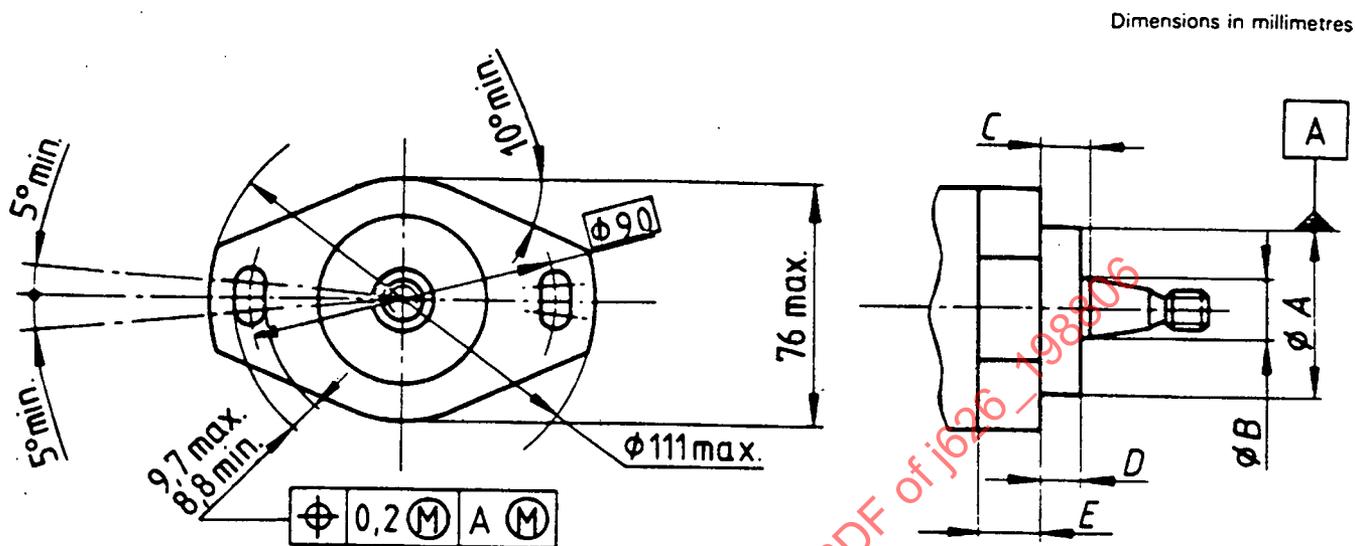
Fuel Injection Pumps - Type 1 End-Mounting Flange
